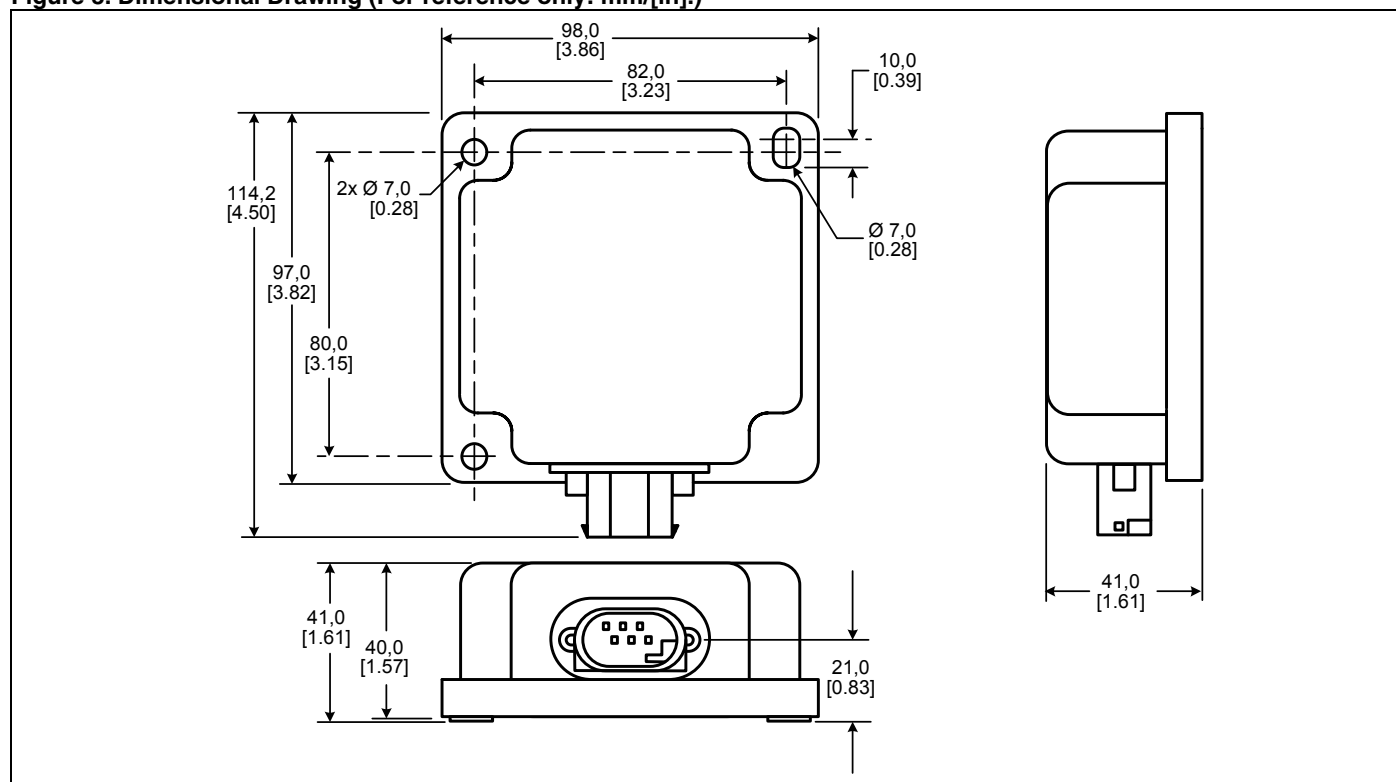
Dimensional Drawing (For reference only: mm/[in.])
